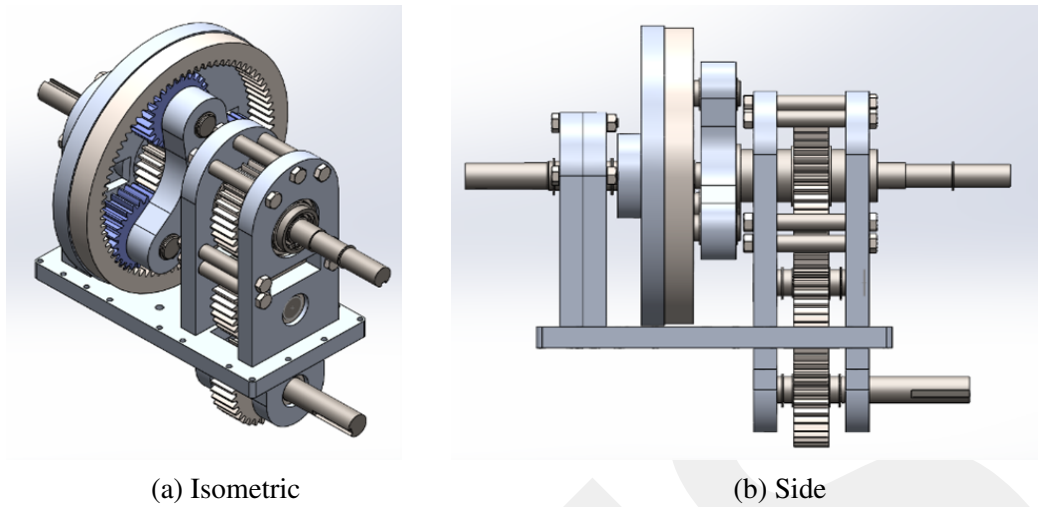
Isometric and Side Cutaway Views of 3D CAD Model.
